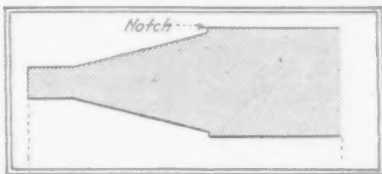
Notch in a Steel Axle Made by a Roughing Tool
